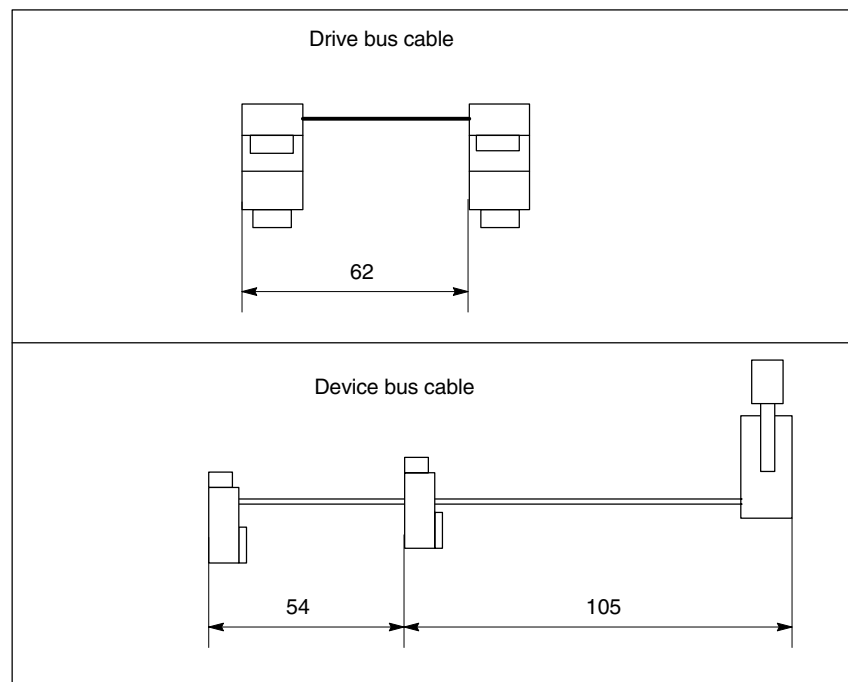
Cable set for axis expansion with SIMODRIVE 611D module
